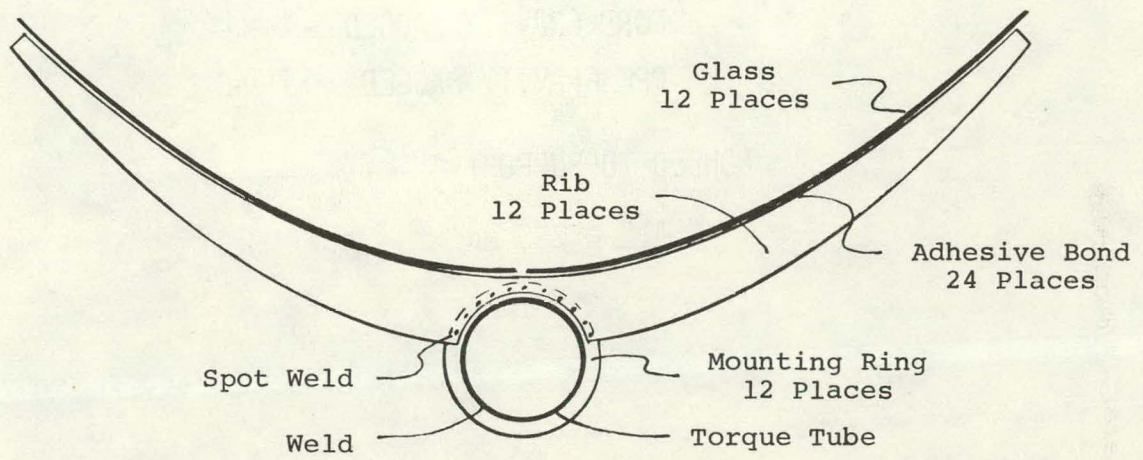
GLASS LAMINATE - RIB MOUNTING
